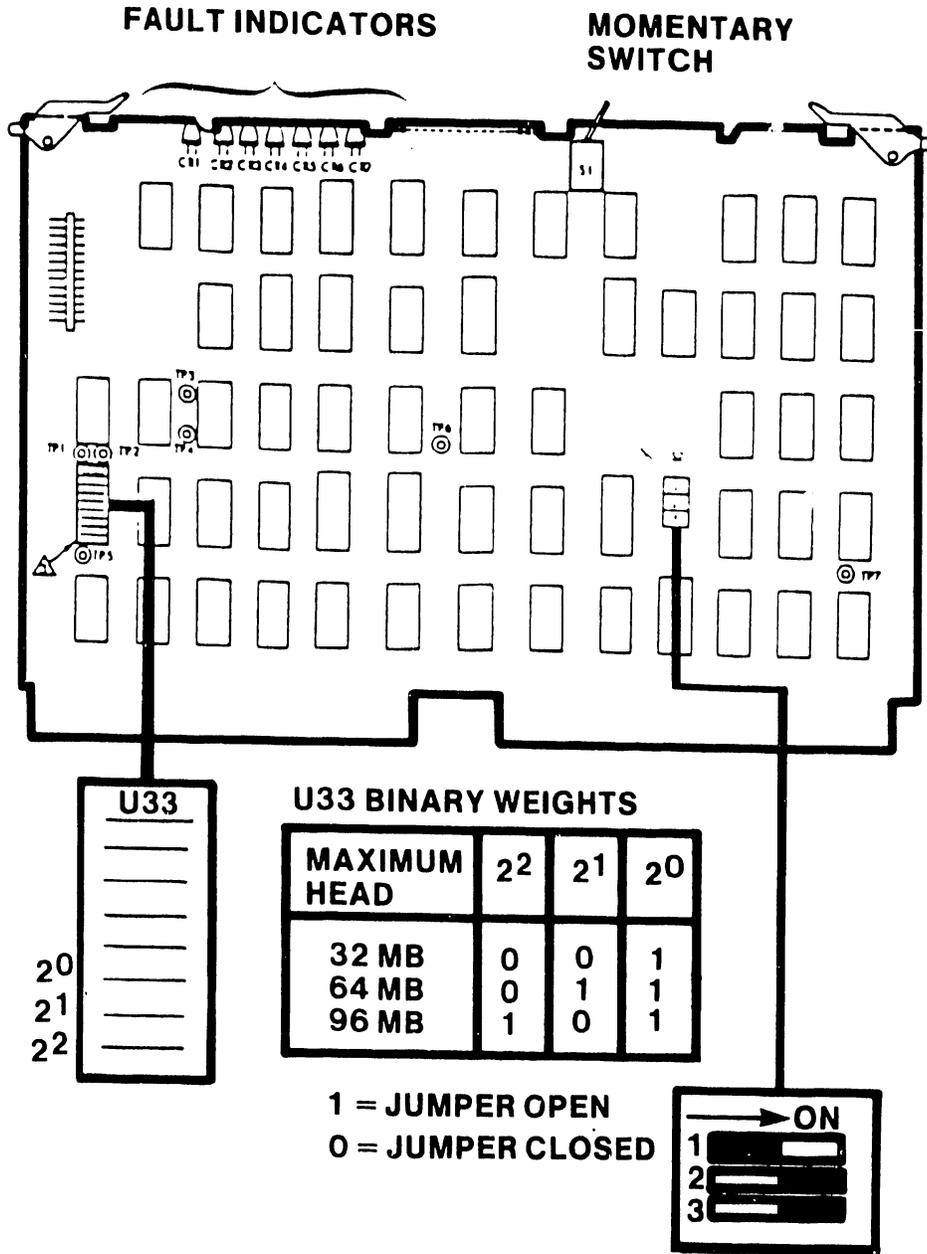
PHOENIX SWITCH SETTINGS FOR CONTROL MUX PCB
